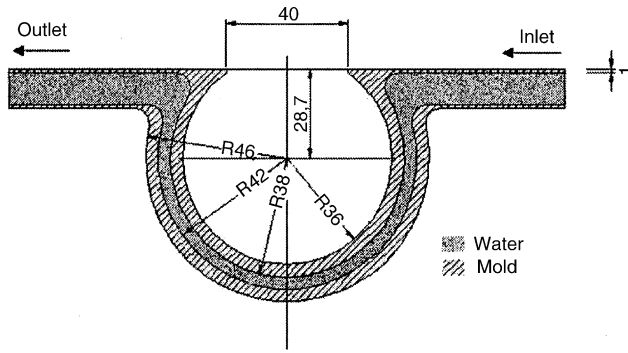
Cross-section and dimensions of the chill mold (mm).
